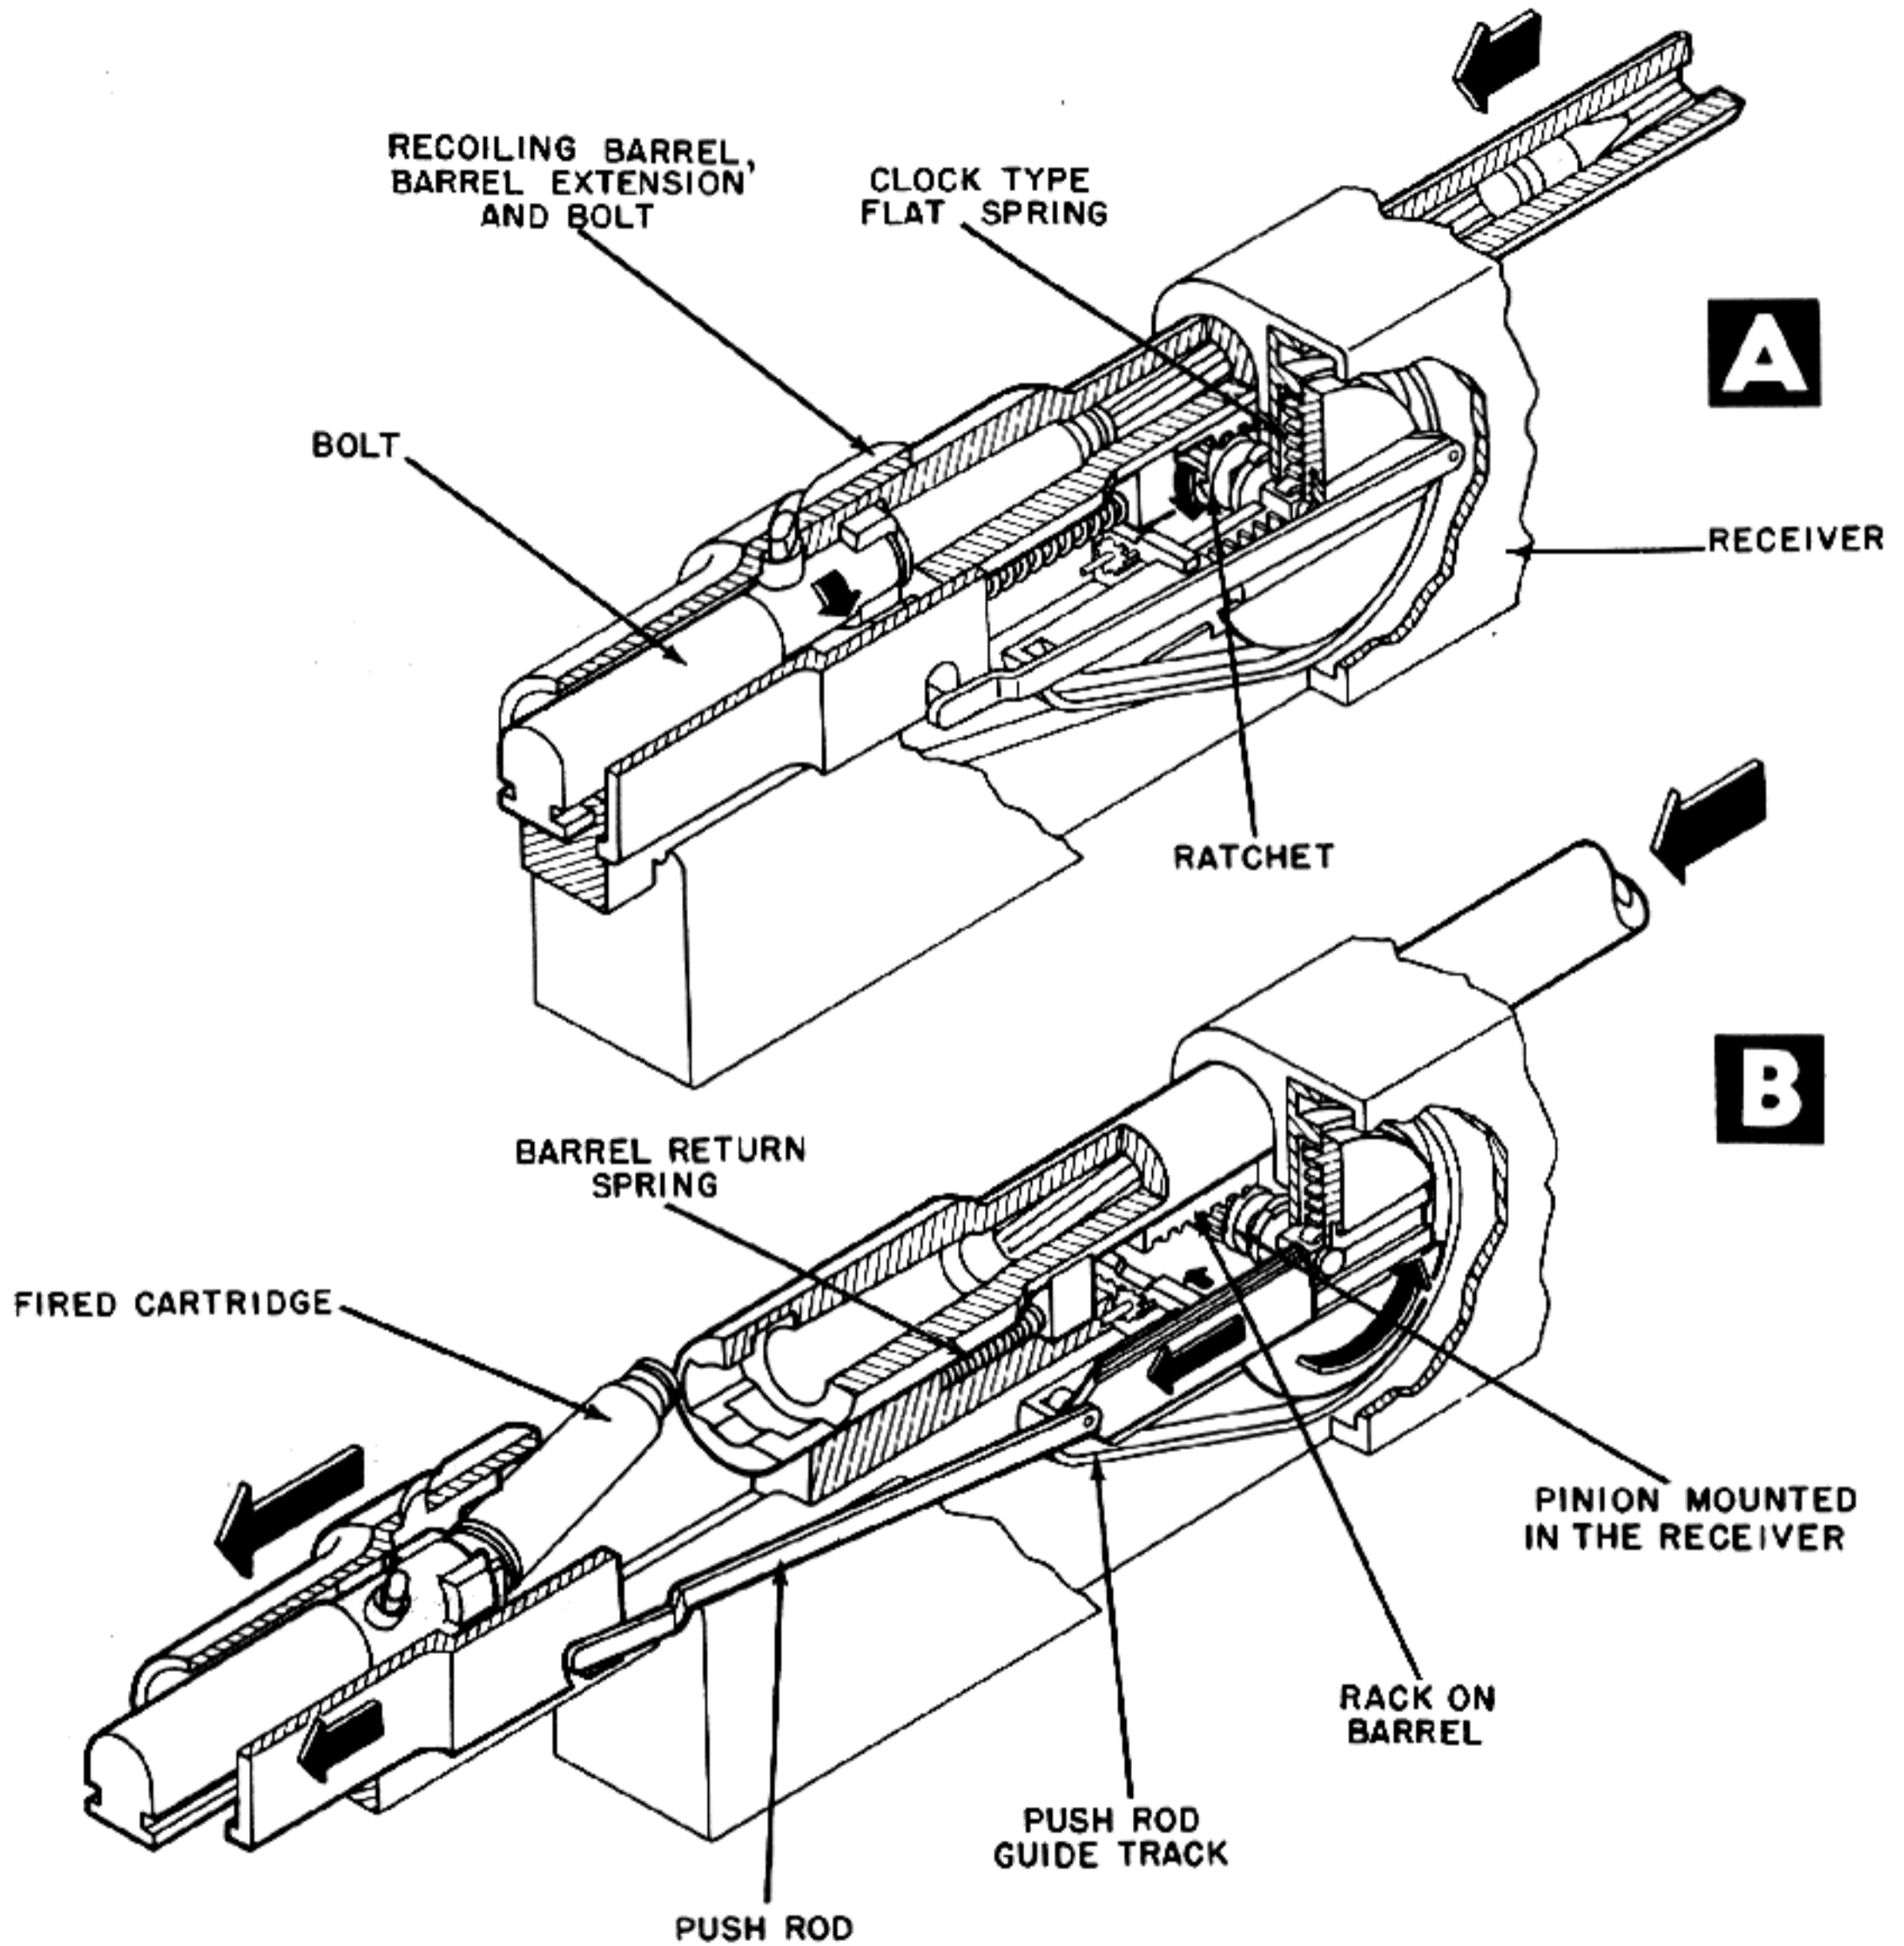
Recoil-Loaded Spring Accelerates Bolt to Rear.
